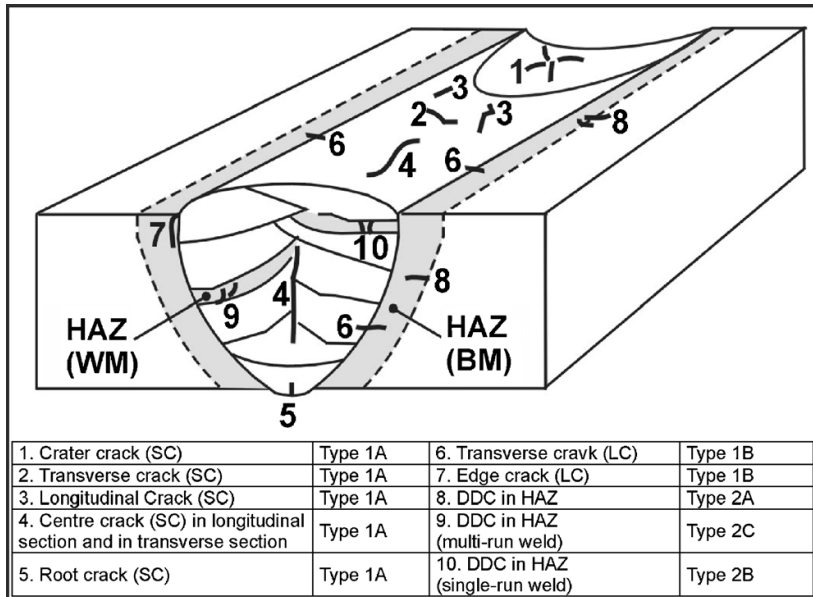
Designation of hot cracks according to their location in the weld metal (WM) or in the heat-affected zone (HAZ) following [1]
